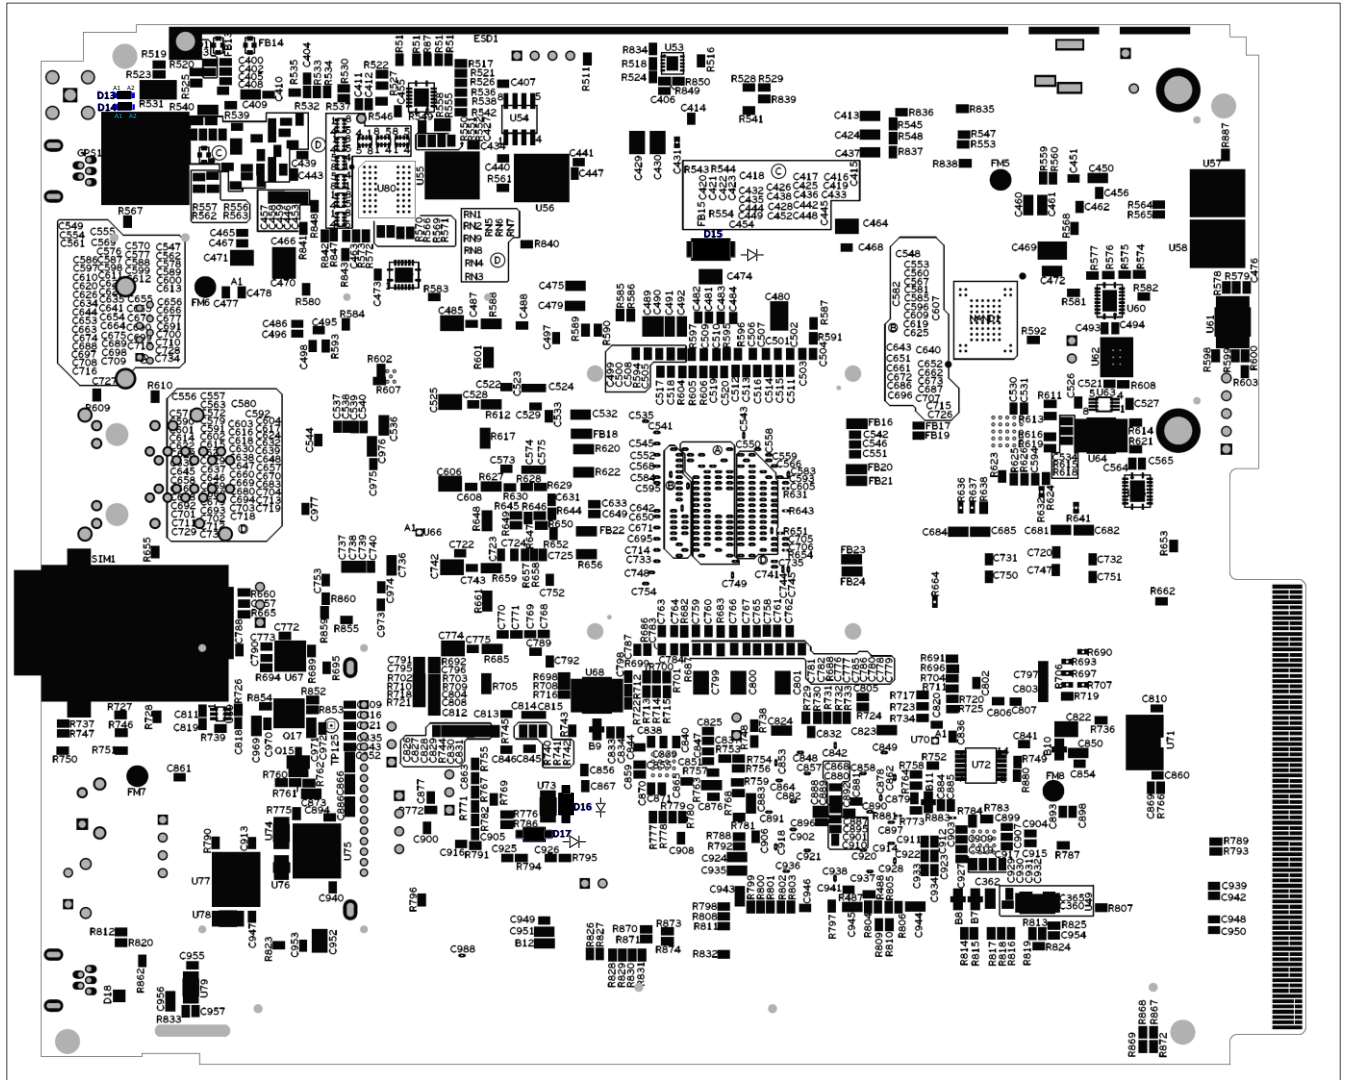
TCIEVMK2LX EVM Board layout – Bottom view
